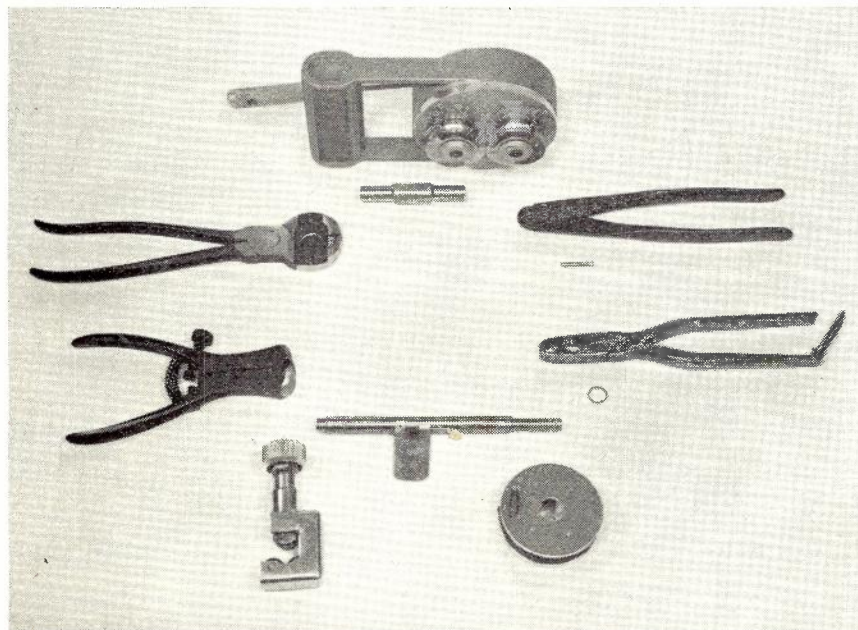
Tools and materials used to joint a Coaxial Tube in the Melbourne-Morwell Coaxial Cable.
